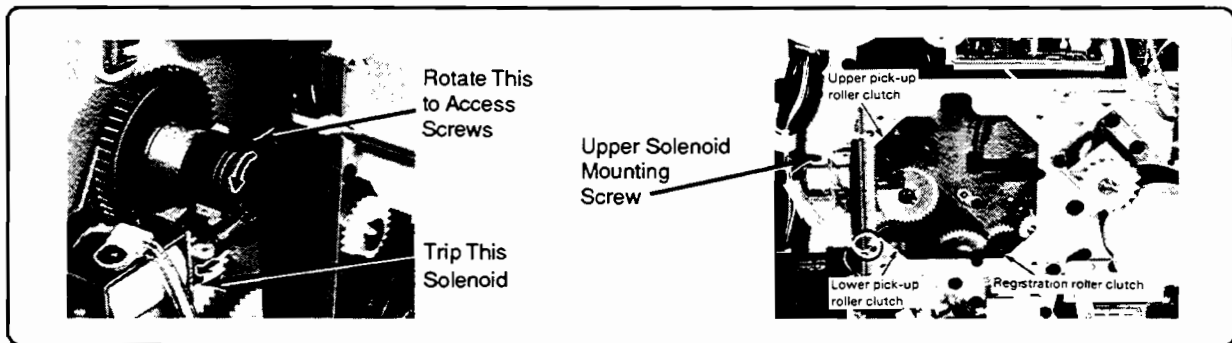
Pick-up Clutch/Solenoid Assembly
